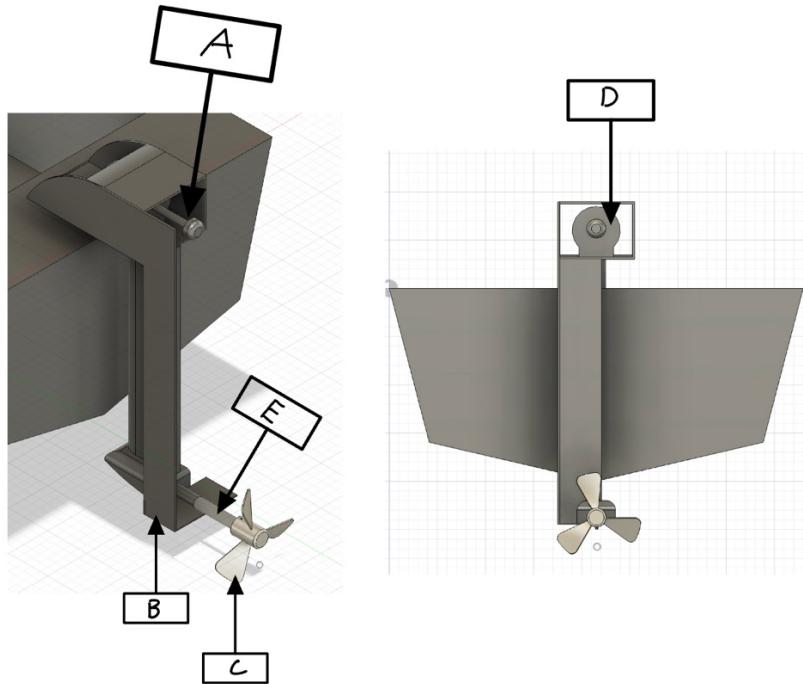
CAD of the 1st Design of Chain Drive Propulsion Design
